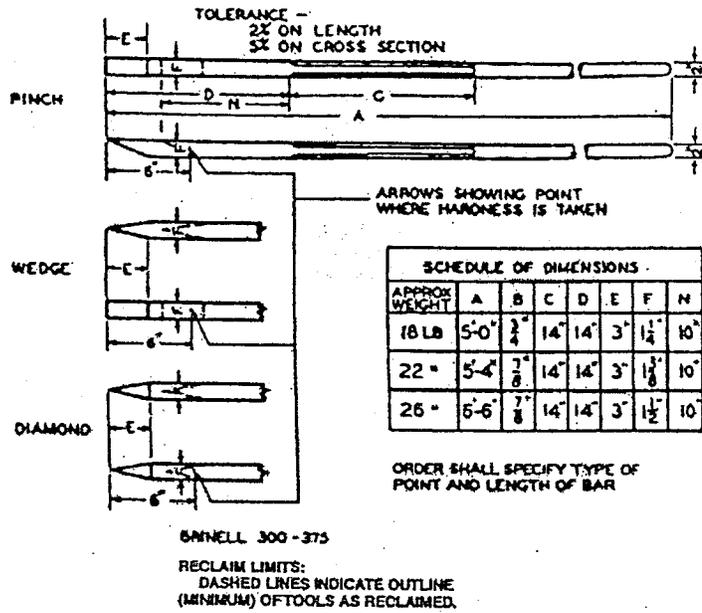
Plan 5-62 - AREMA Lining Bar
